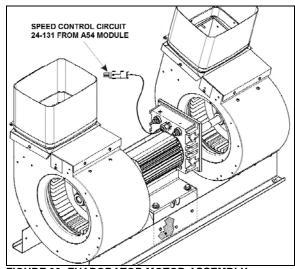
EVAPORATOR MOTOR ASSEMBLY
